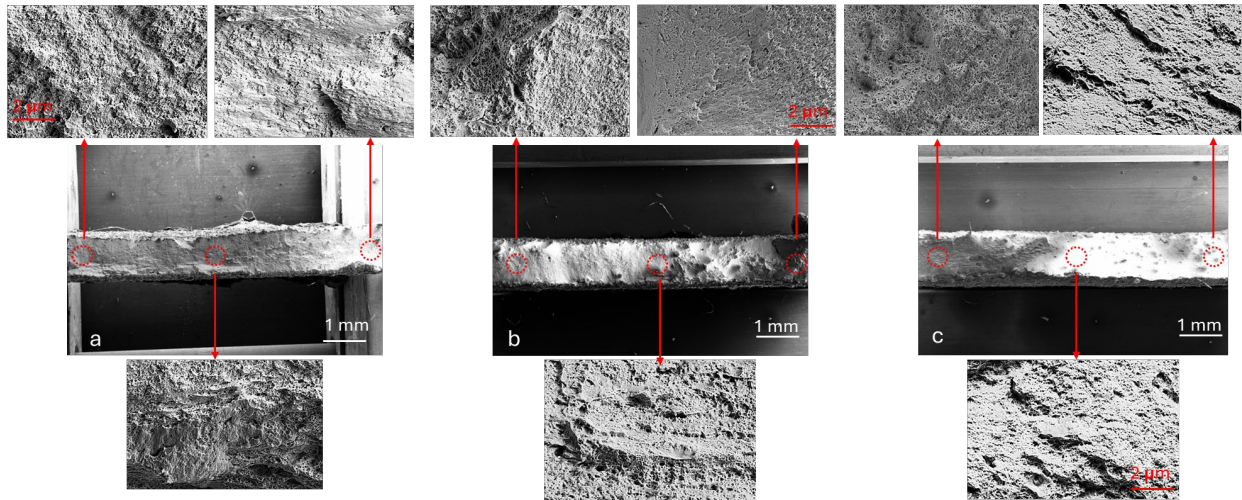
SEM images of fracture surfaces of SDB samples for 316L (a) 0°, (b) 45°, and (c) 90°.
